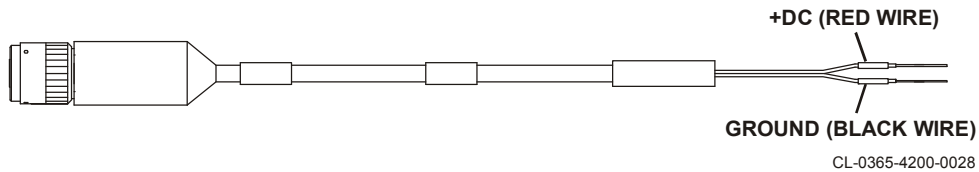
Cable Assembly, BGAN DC Power to 2 Leads, 12043-0896-A0xx
